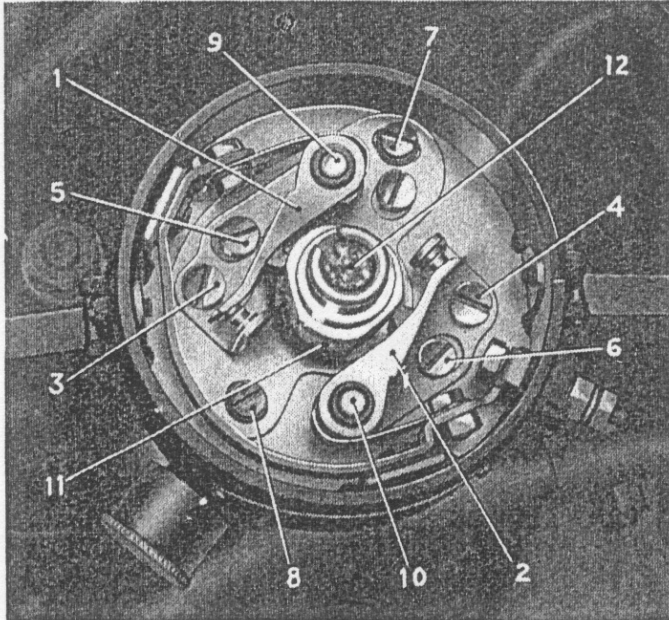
INTERIOR OF CONTACT BREAKER.
